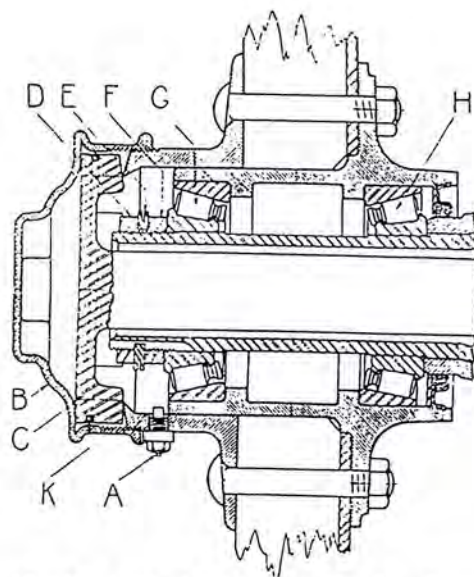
Rear Wheel Bearings and Adjusting Nuts.
